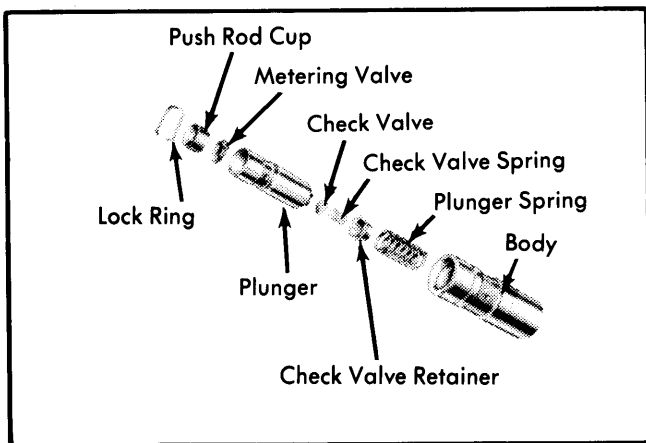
Disassembled View of Hydraulic Valve Lifter
